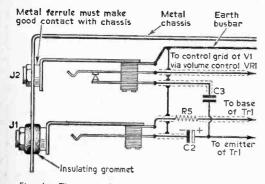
The method of mounting the jack sockets and the connections to them.
